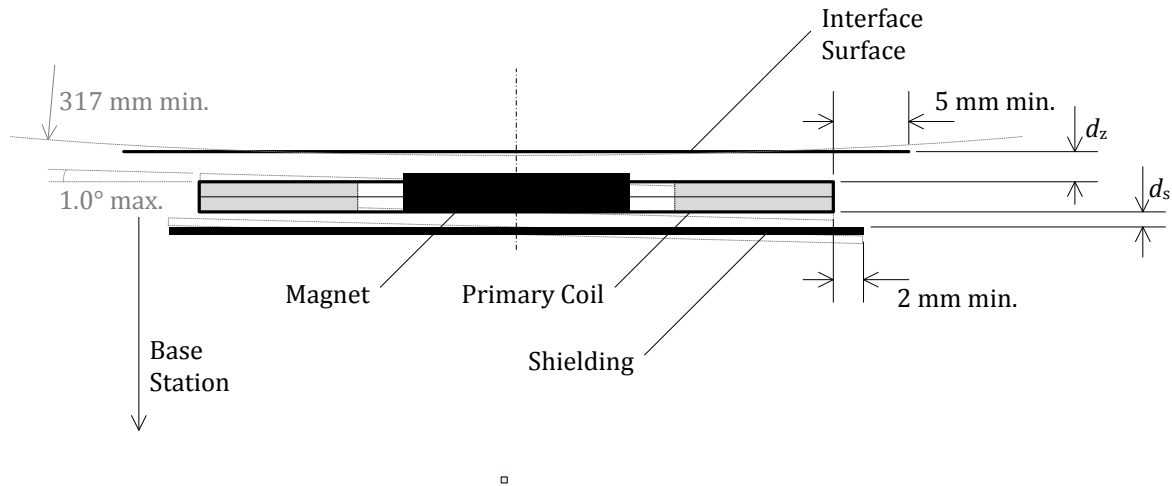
Primary Coil assembly of Power Transmitter design A9
